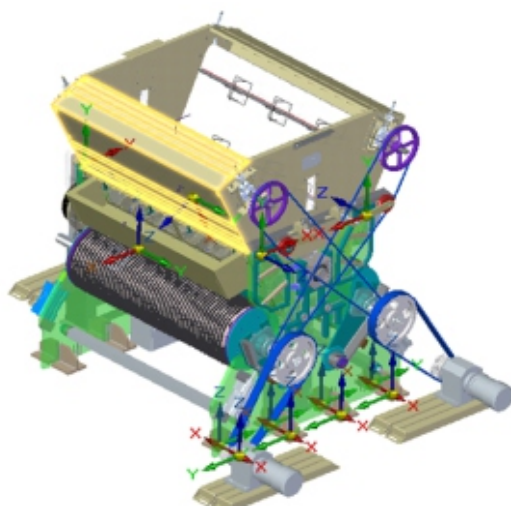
View of High-Capacity Double Roller Gin with Auto-feeder in 3D
